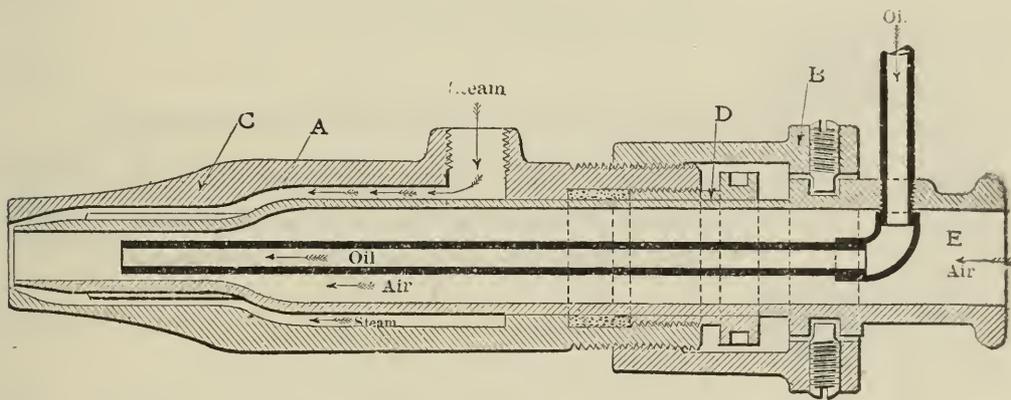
SECTIONAL VIEW OF REED BURNER.
